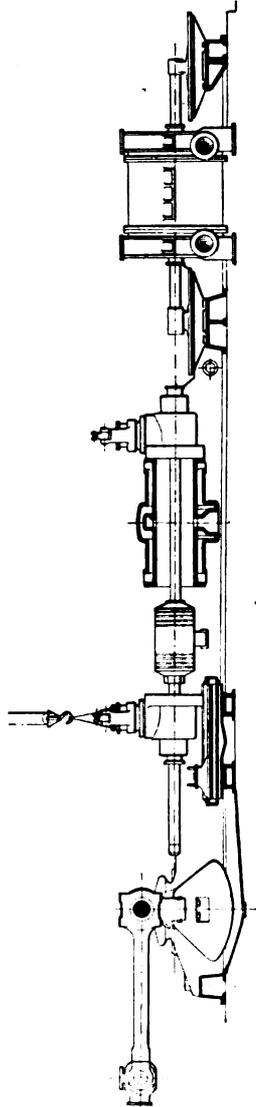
Removal of Piston from front end of Blowing Engine, Siegener.
